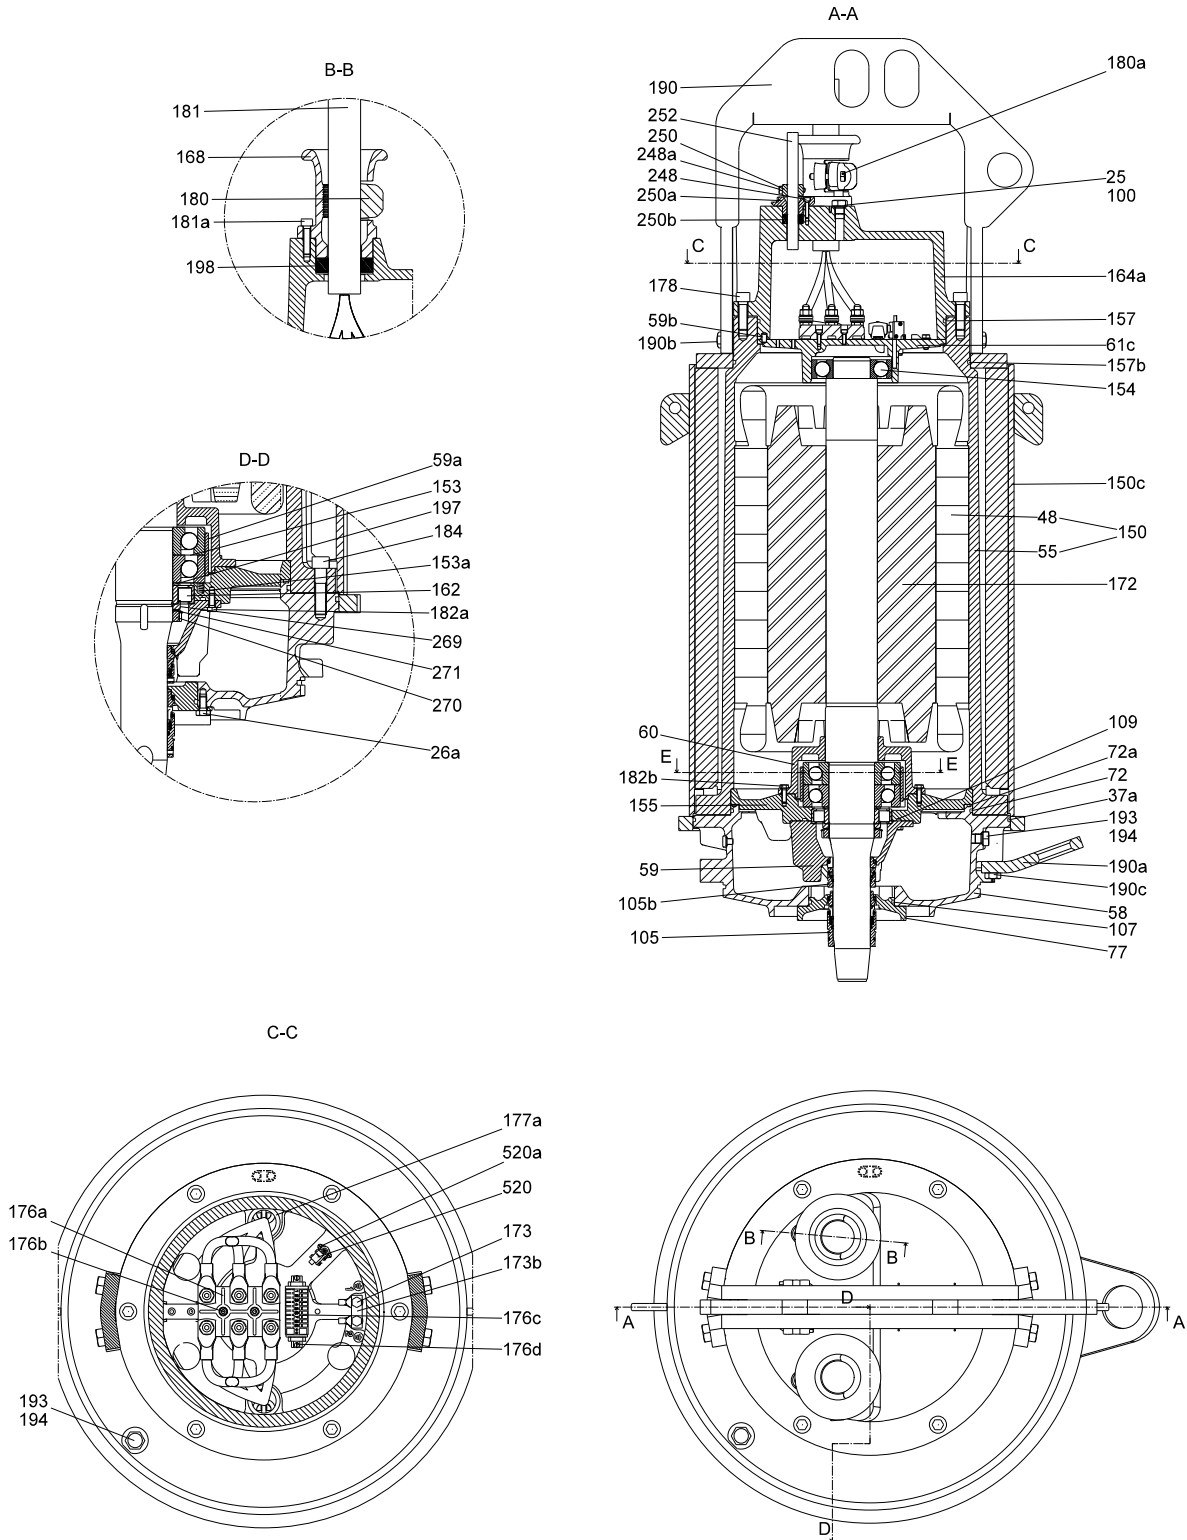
Non-explosion-proof motor with cooling jacket (installation types C, D and H)
